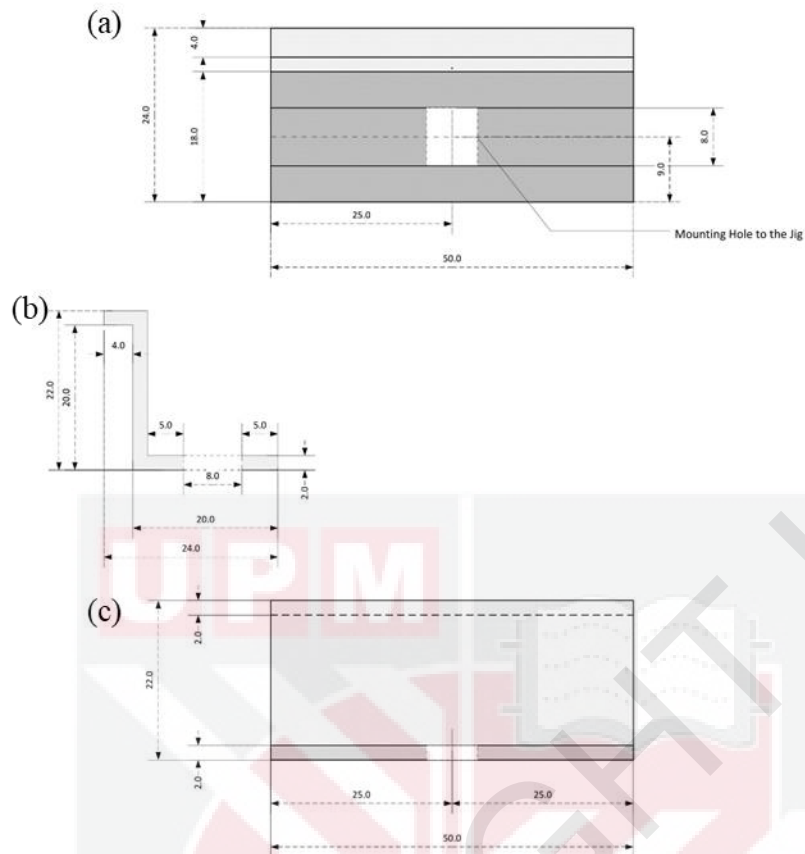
Schematics of the centre bracket. (a) Top view, (b) side view and (c) front view
